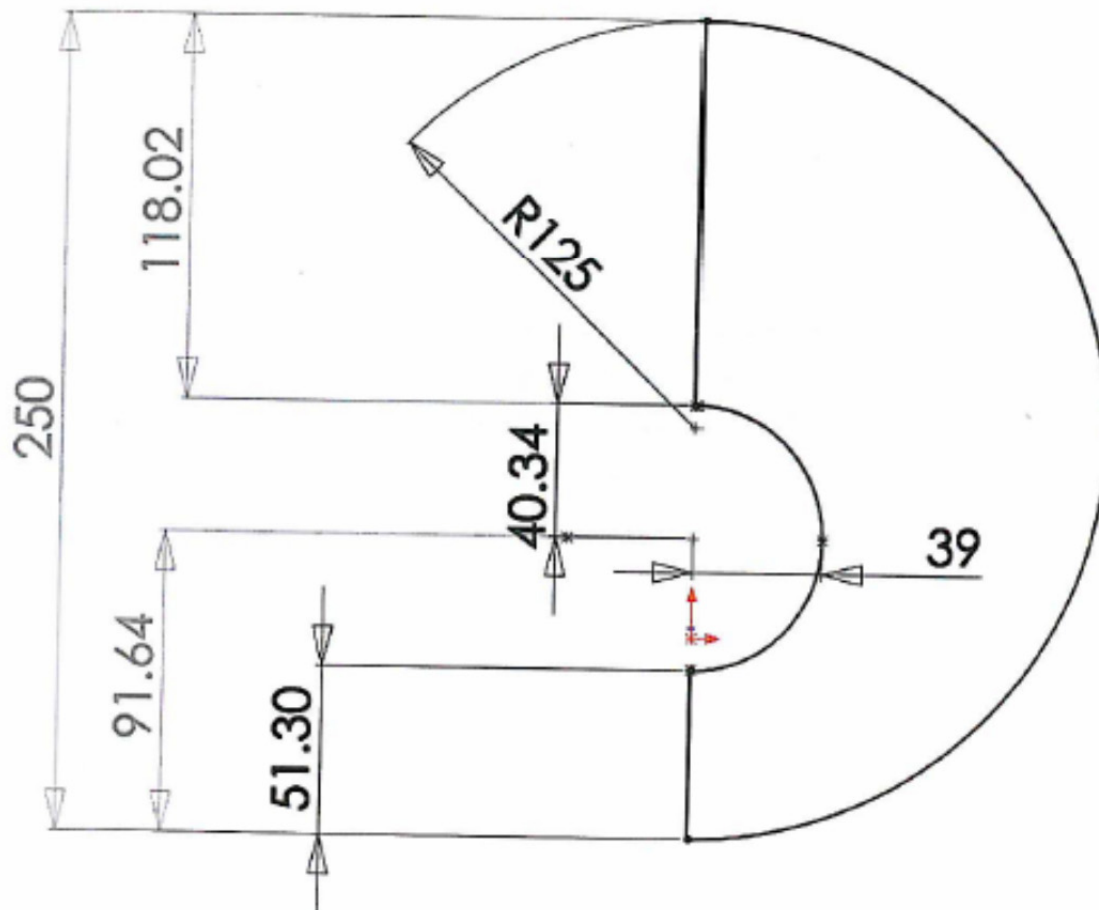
Dimensions for an elliptical cut to match a 15° angle on the pipe, with a one millimetre clearance around the pipe.
